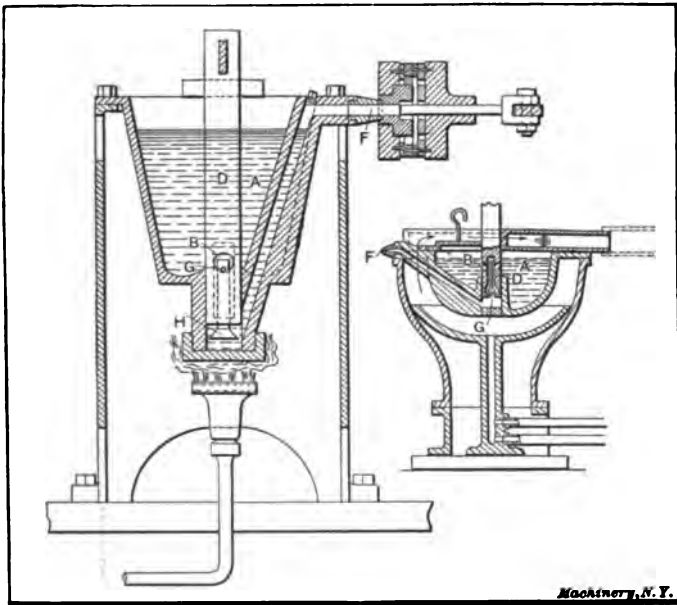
Die-casting Machine patented in 1892. Fig. 6. Improvement made in 1898 on Machine shown in Figs. 1 and 2
